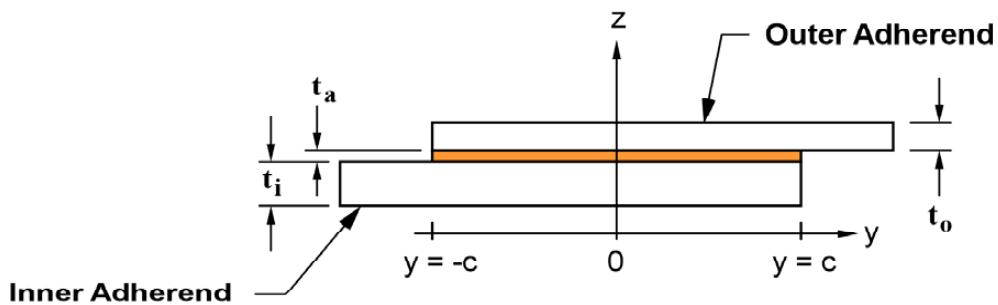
SINGLE LAP OR SYMMETRIC DOUBLE LAP JOINT
